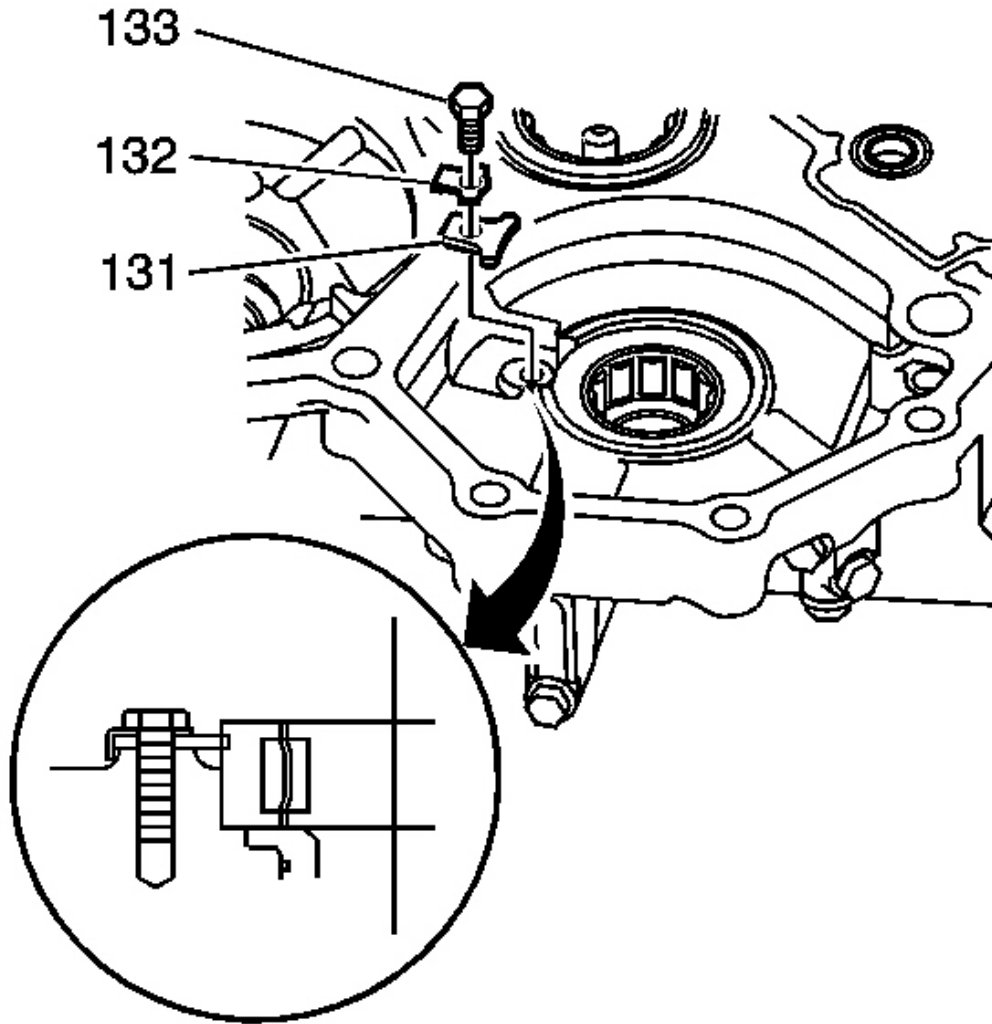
1st/2nd Clutch Shaft Intermediate Bearing Retainer & Bolt
